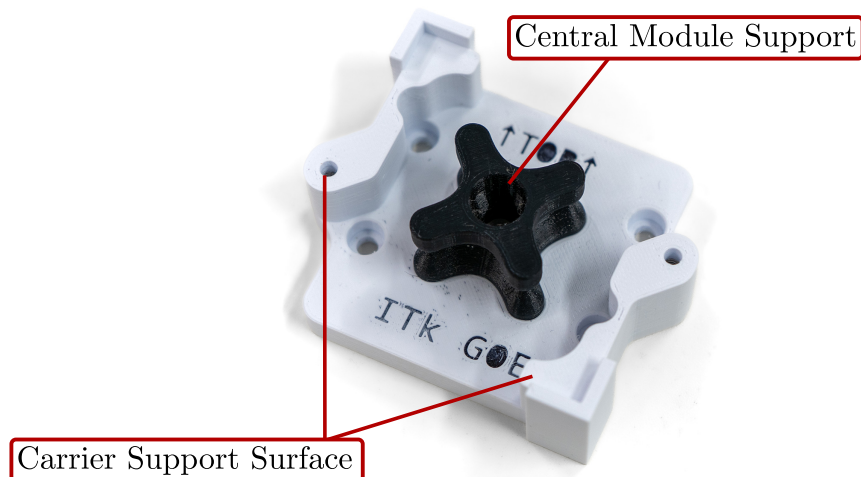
3D-printed fixture for backside flatness measurements. The central module support is an interchangeable component that can be removed or adjusted as needed. The module carrier rests upside down on the outside frame.
